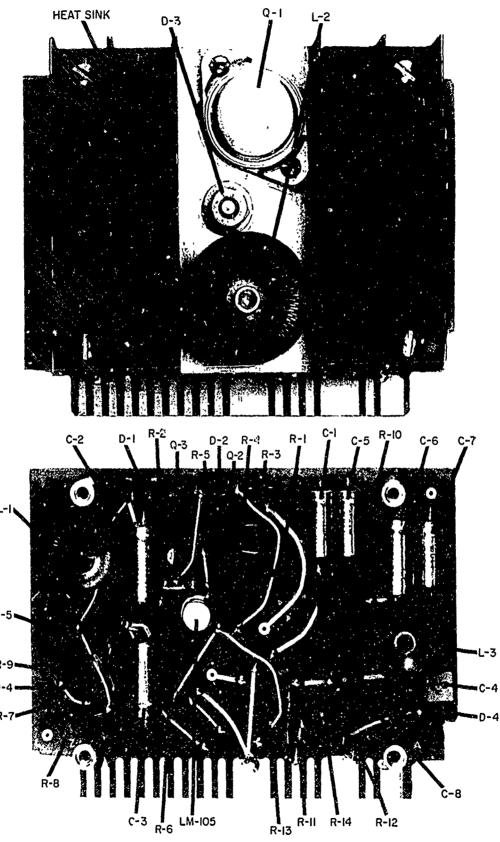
Board 30 (cont.). Board 30-2. 3-ampere switching regulator (bottom, heat sink removed).
